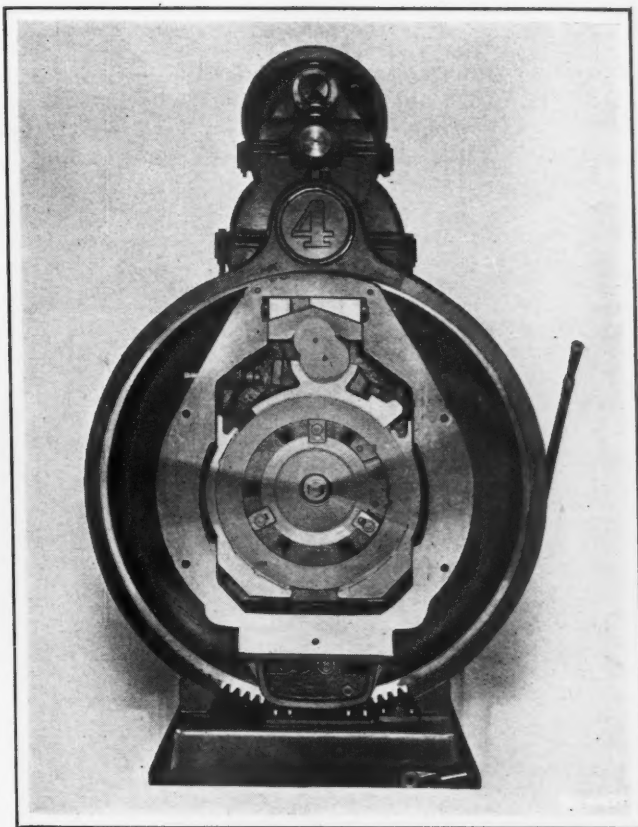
Front View of the Tube Shear with the Cover Plate removed
